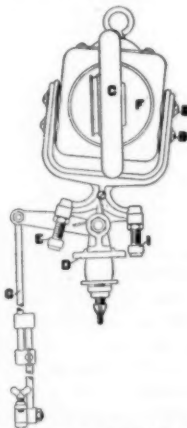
PARAGON SEWING-MACHINE TRANSMITTER.
